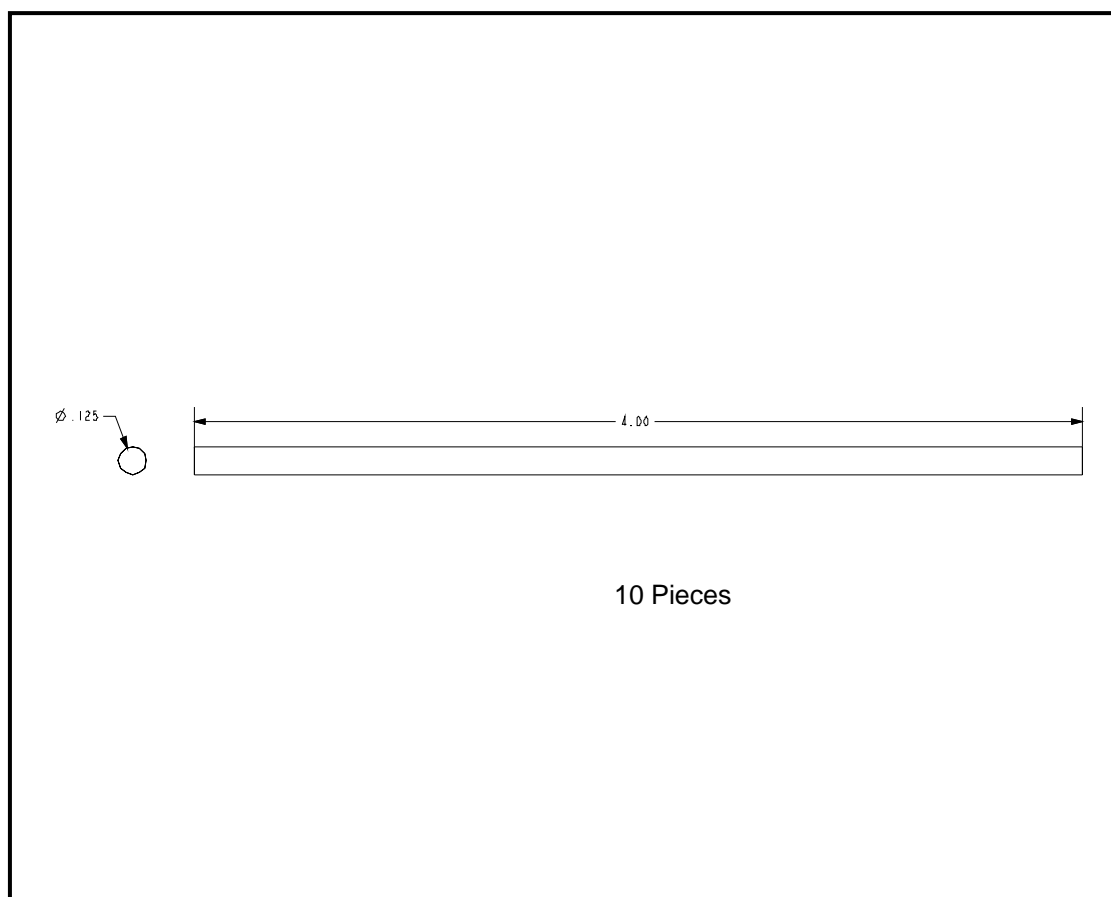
CAD Drawing of the Multi-Sampling Port JSR Mold – Sampling and Exhaust Holes Rod (Material: Stainless Steel, Filename:multiheightsamplingrod.drw).
